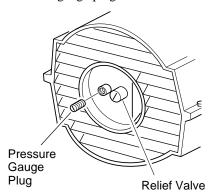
Pressure Gauge Plug Removal 40,000 & 60,000 Btu/Hr Models Shown
